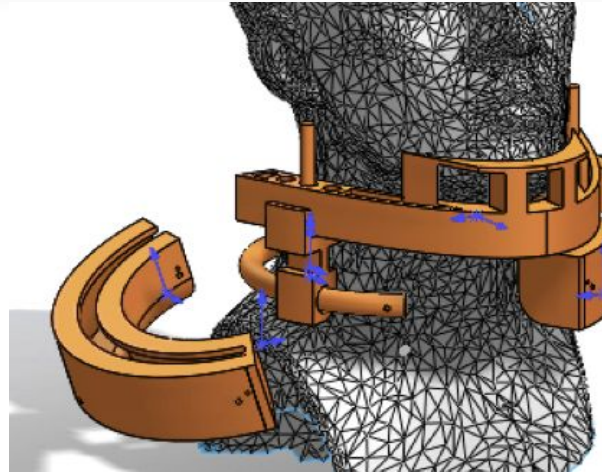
An exploded view of the device shows that the inner spring track is contained within an outer shell. This isolates spring movement.
